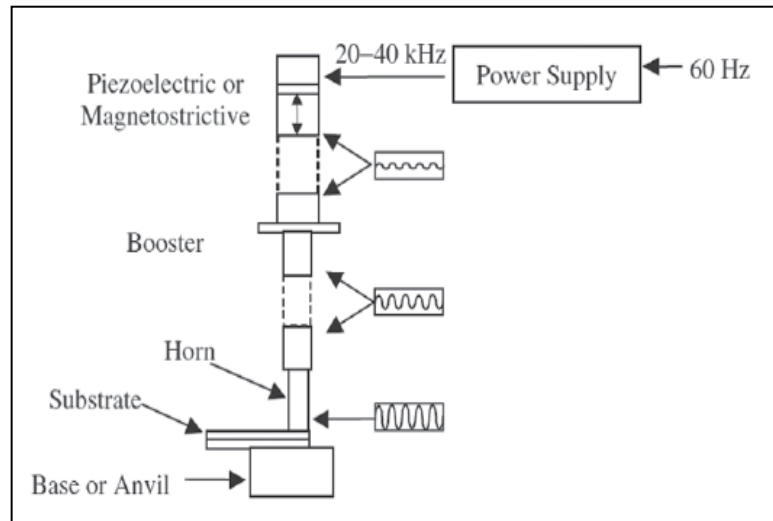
Diagram of an ultrasonic welding machine [32].
